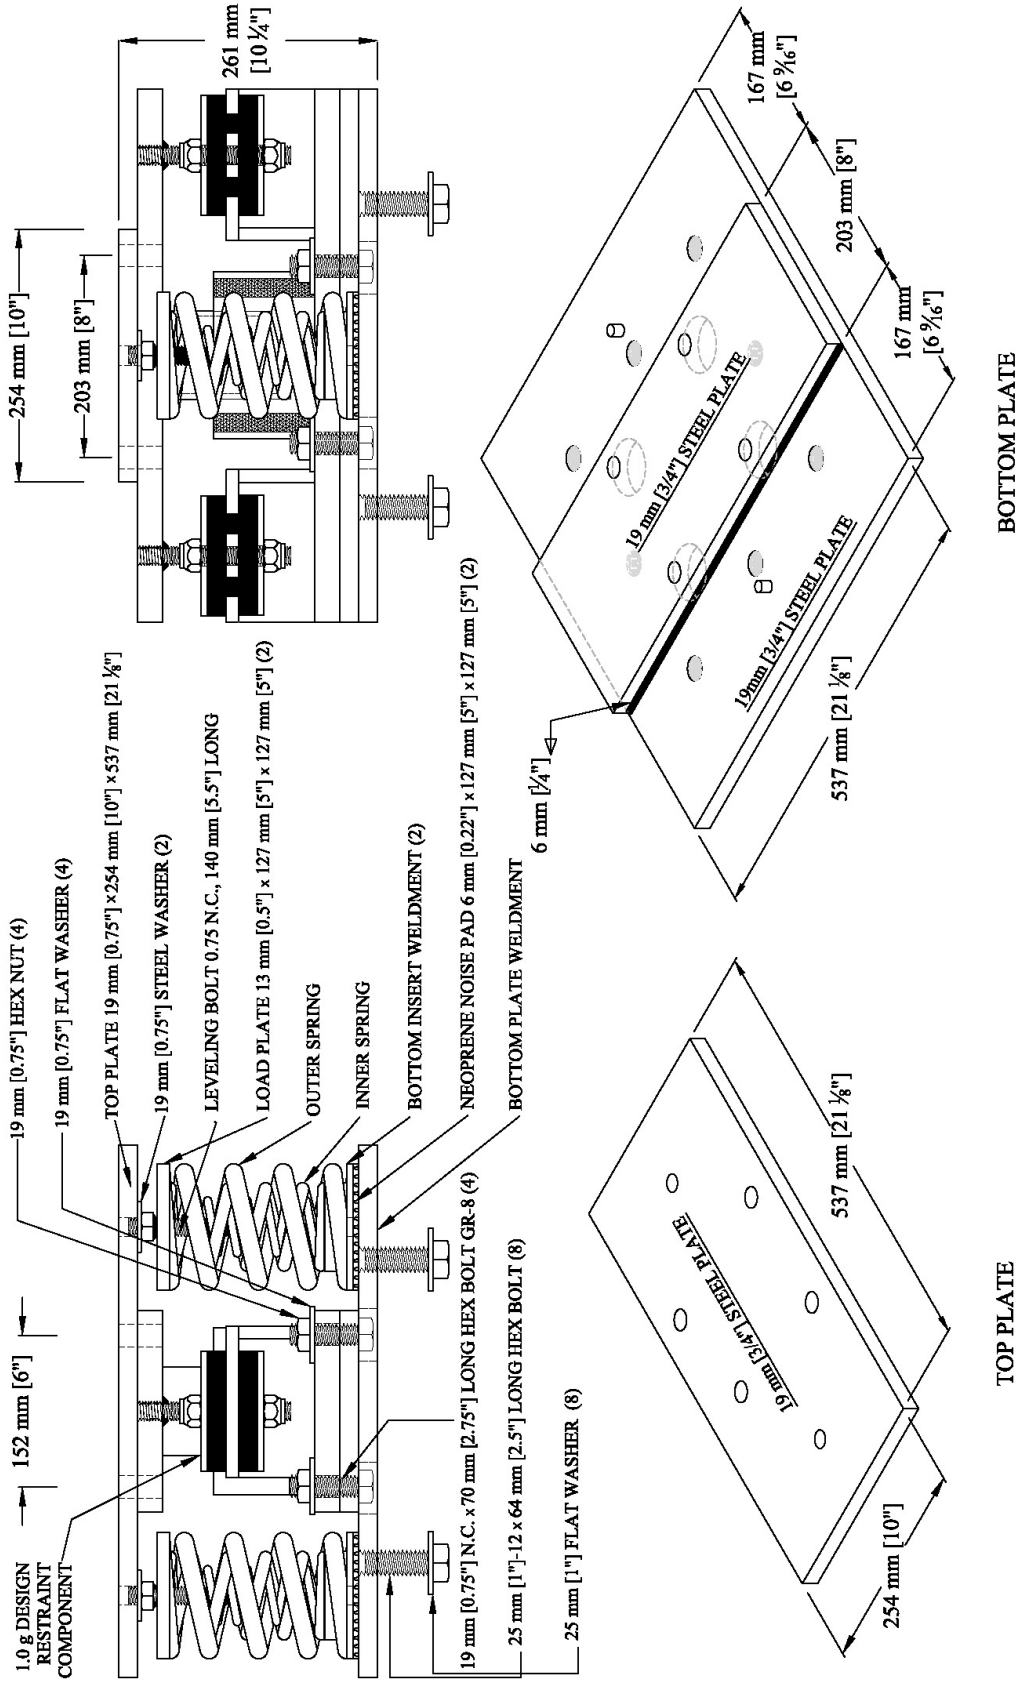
Assembly Details of 1.0 g Design ASHRAE-Type I/R System (units: mm [in])
